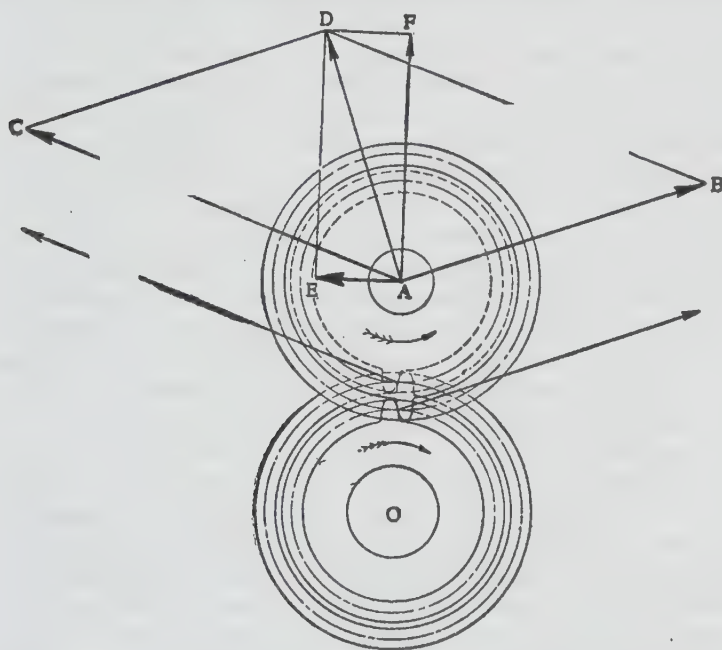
GEAR AND BEARING PRESSURES IN AN ALL-SPUR PLANETARY SET.
